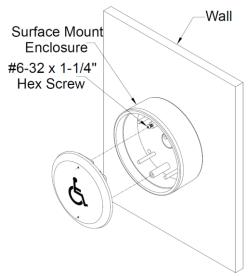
8228-01 4 1/2" and 8228-00 6" RND Surface Mount
